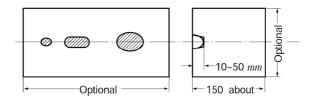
Dimensions and Shape of Test Coupon (Units: mm)
